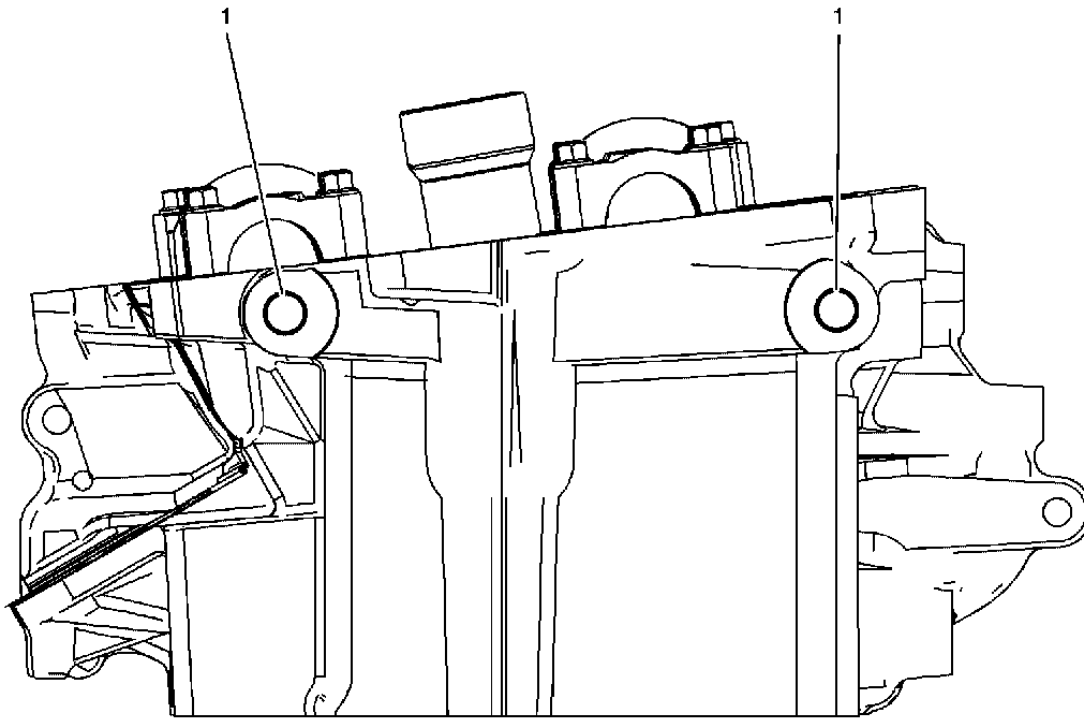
Identifying Right Cylinder Head Exhaust Face
